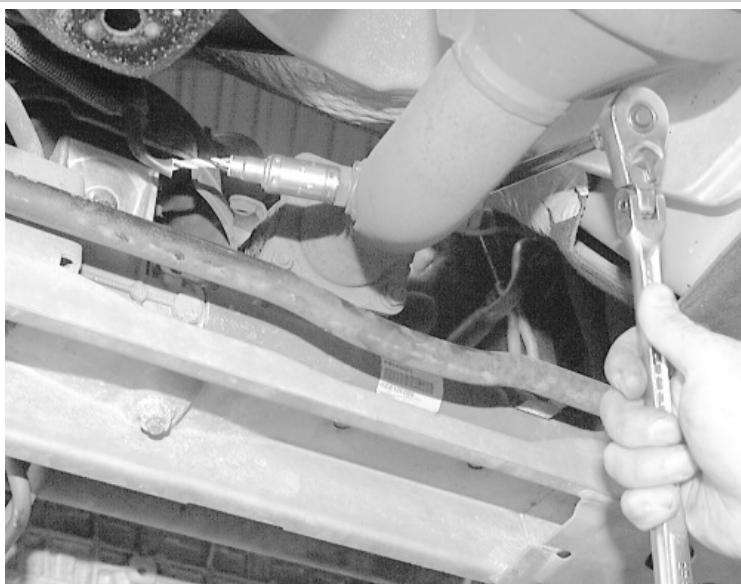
Remove the exhaust pipe-to-manifold flange retaining hardware ...
